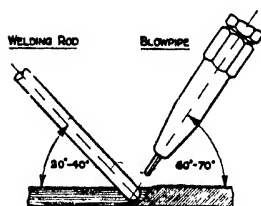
ANGLES OF ROD AND BLOWPIPE FOR CAST-IRON WELDING
